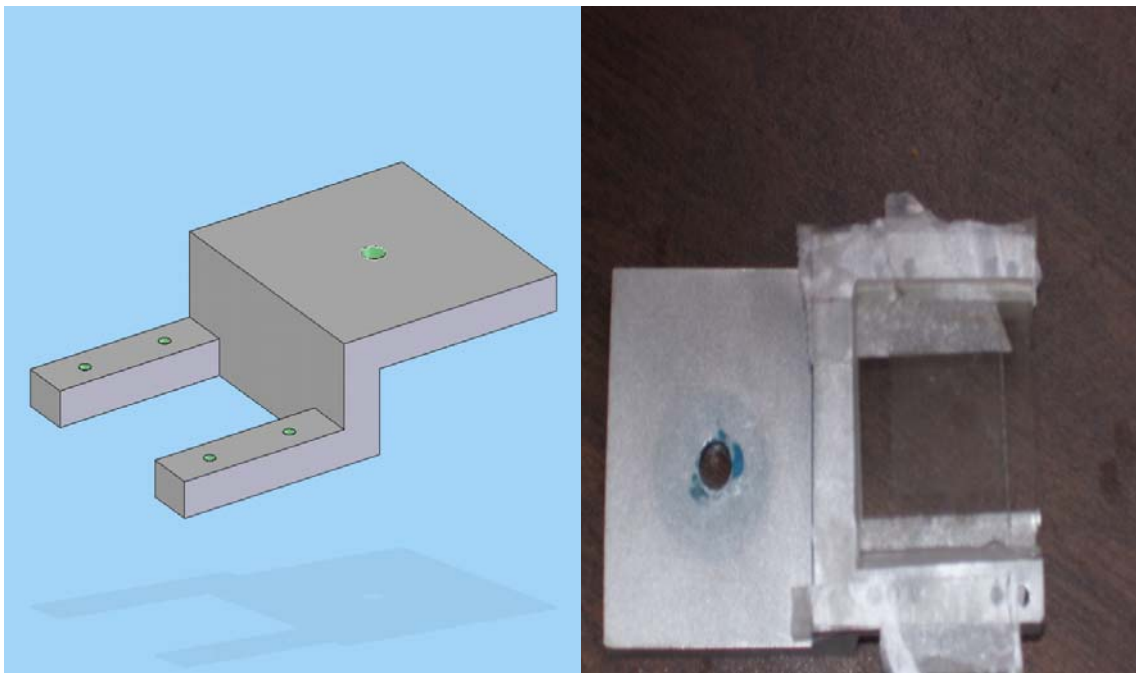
Design and photographic view of the slide holder which holds the PDMS specimen
